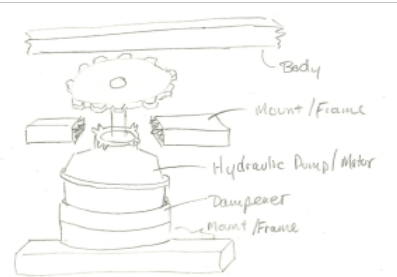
Pump/Motor Vertically Mounted to Frame
